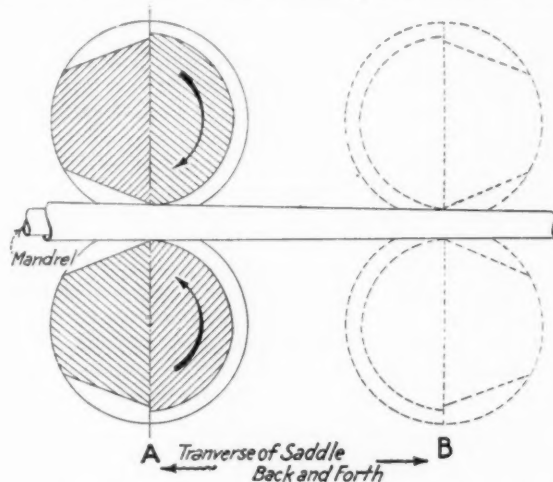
SWAGING-FORGING DIES IN THE TUBE-REDUCING CORPORATION'S MACHINE
